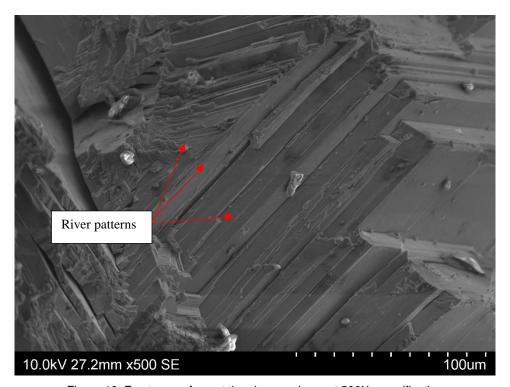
Fracture surface at the zinc specimen at 500X magnification
